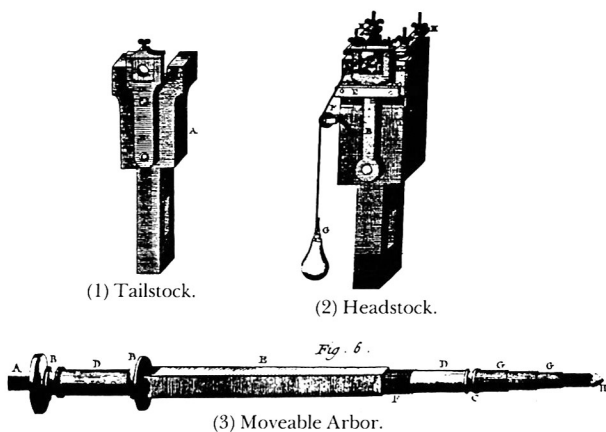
Arbor Bearings and Arbor for an Ornamental Lathe.
